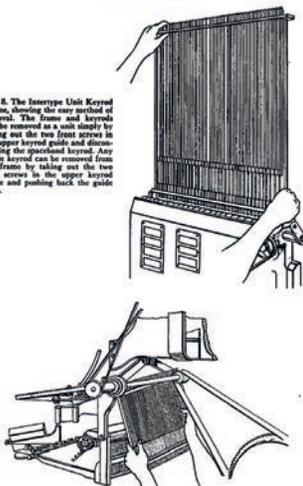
The Intertype Unit Keyboard Frame, showing the easy method of removal. The frame and keyrods can be removed as a unit simply by taking out the two front screws in the upper keyboard guide and disconnecting the special keyboard. Any other frame can be removed from the frame by taking out the two rear screws in the upper keyboard guide and pushing back the guide strip.
